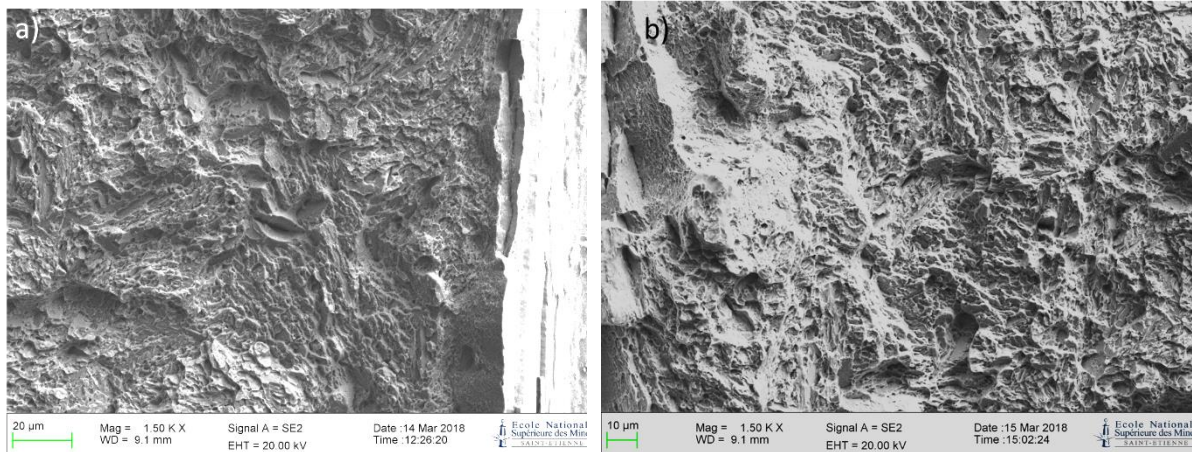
Fracture surfaces of the two samples hydrogen-charged for a) 4 hours and b) 13 hours, broken after Charpy test.
